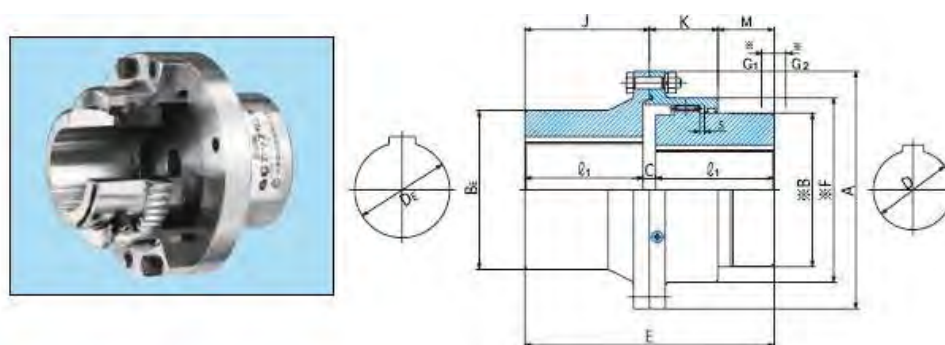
Gear coupling (From catalog of the Manufacturer: Seisa Gear, Ltd.)
